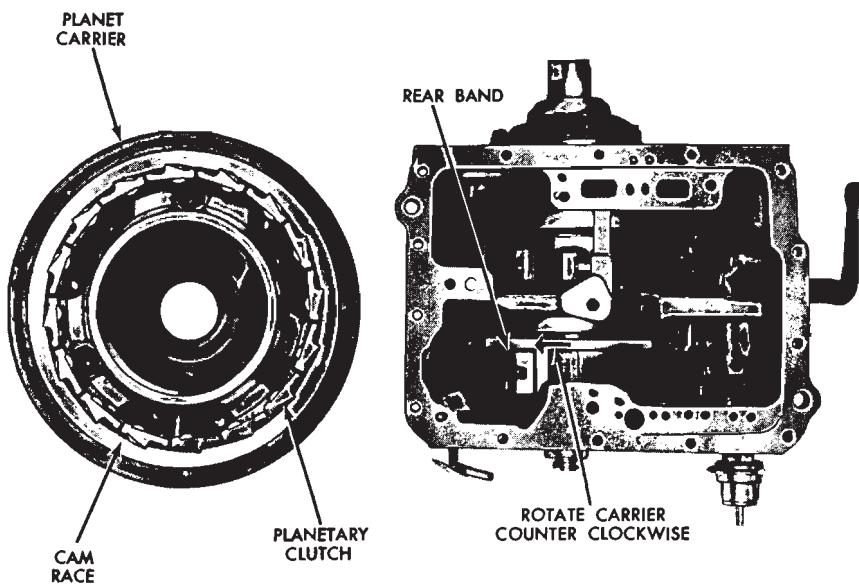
Planetary Clutch Installation in Carrier—Chamfered Center Support
